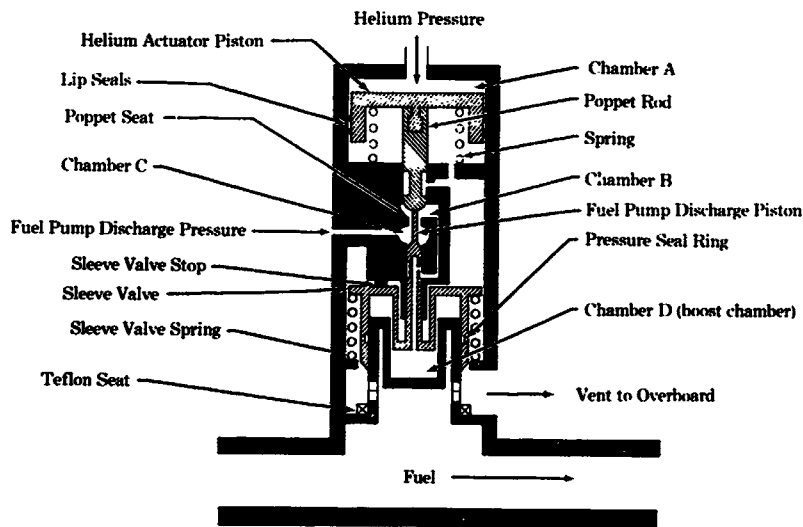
Fuel Pump Cooldown, Bleed, and Pressure Relief Valve Schematic
